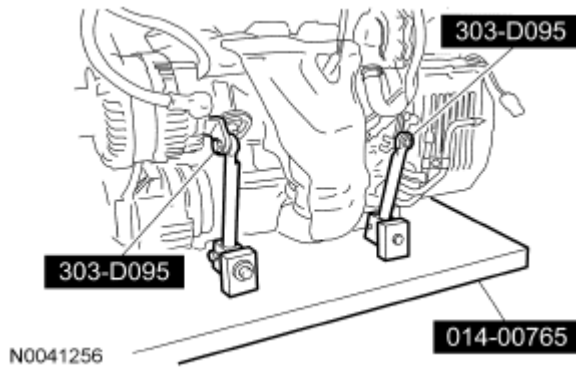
Identifying Special Tools (303-D095, 014-00765)
